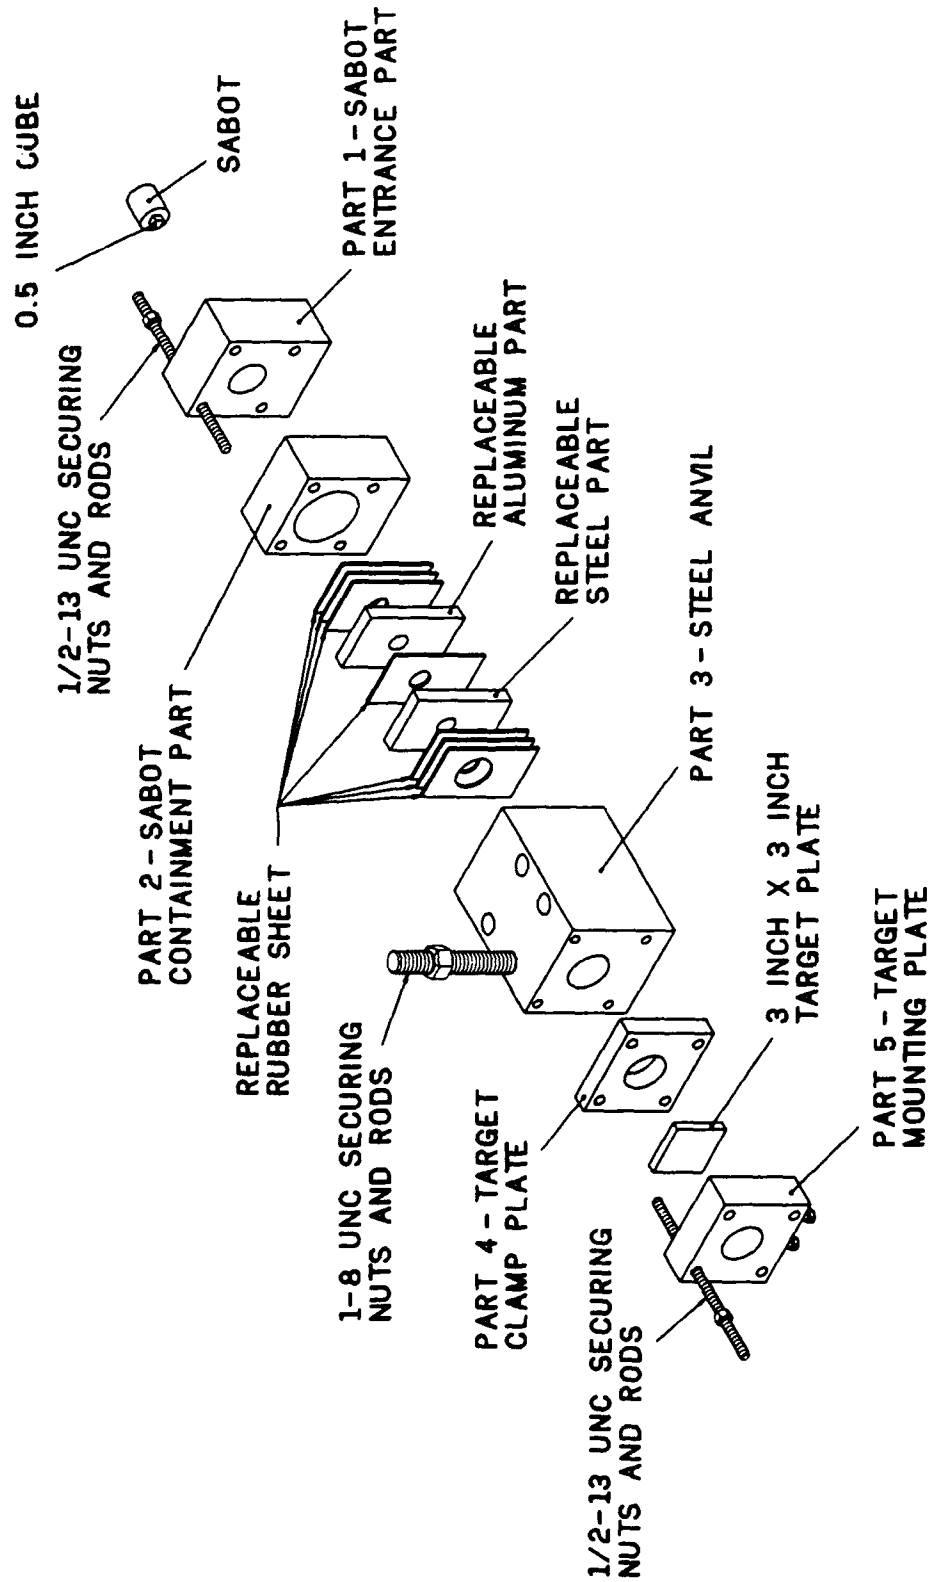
SCHEMATIC OF SABOT STRIPPER WITH ATTACHABLE SMALL TARGET ASSEMBLY
